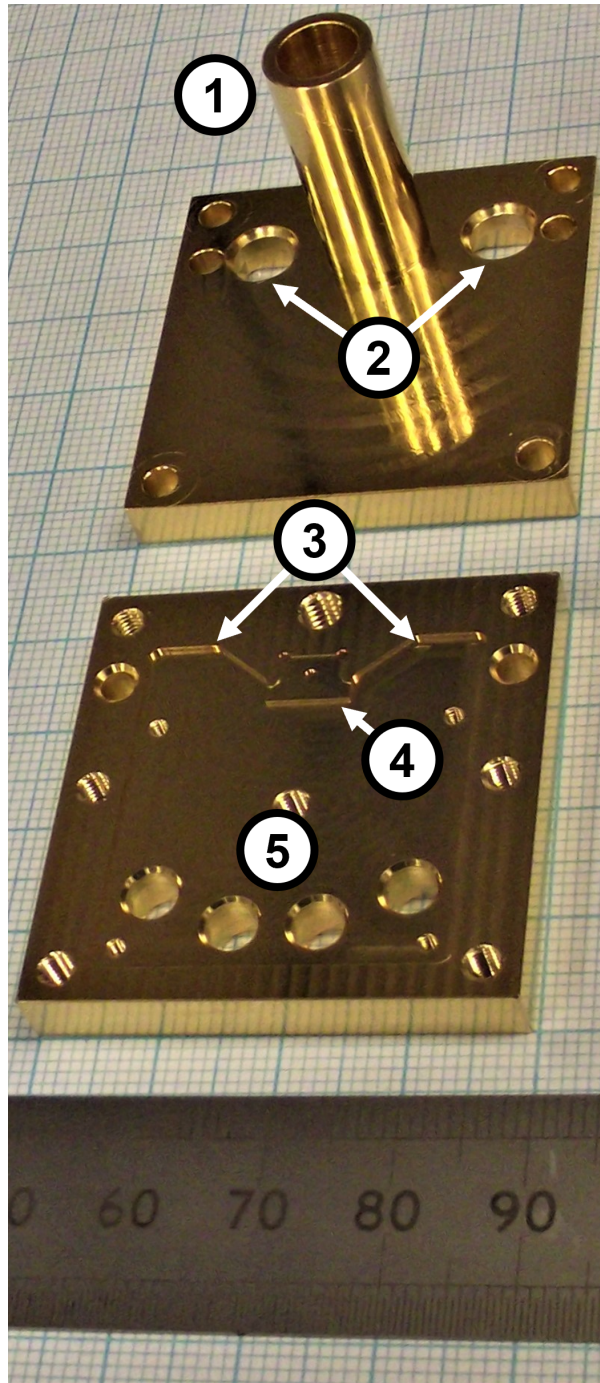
The split block image shows the feedhorn (1) and the holes for magnetic biasing (2) drilled into the top block. The bottom block is milled out to accommodate the magnetic shoes (3) and the IF transformer, which is bonded to the mixer chip sitting in the bottom block on a pedestal with the backshort section (4). The DC and IF signals are connected via panel-mount SMP connectors fed through holes (5).
